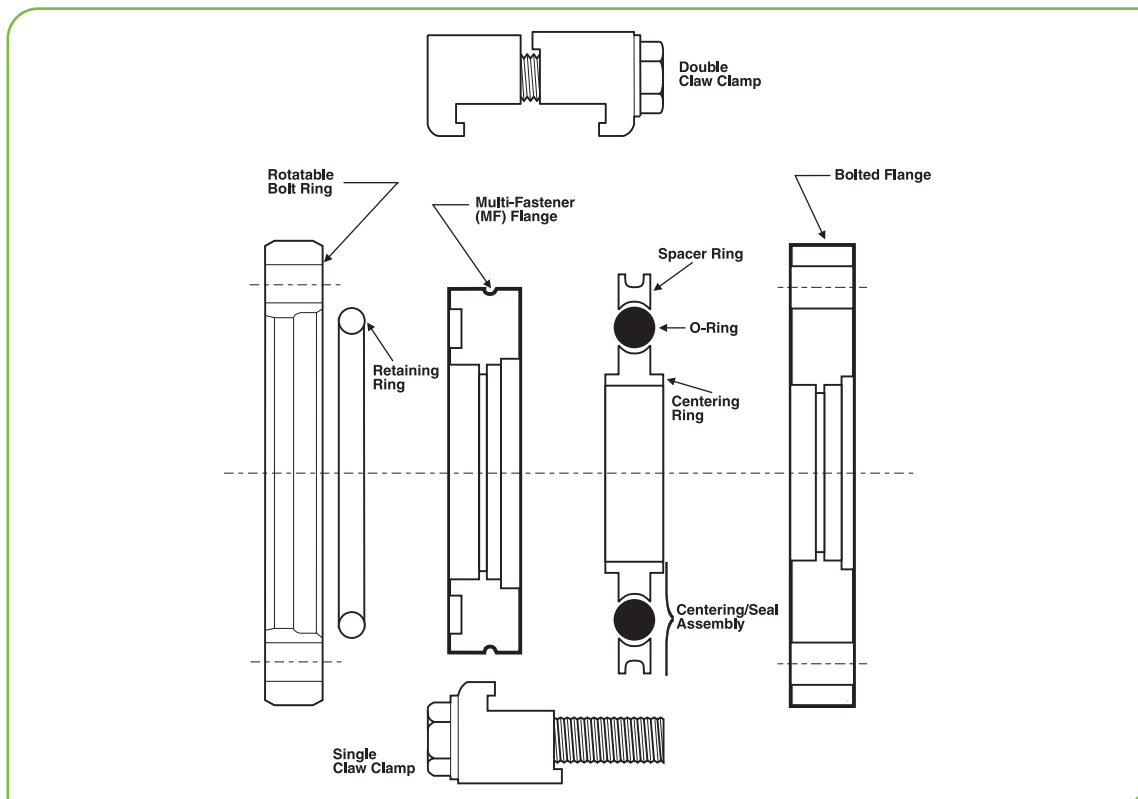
Component Nomenclature for the ISO Universal Flange System
